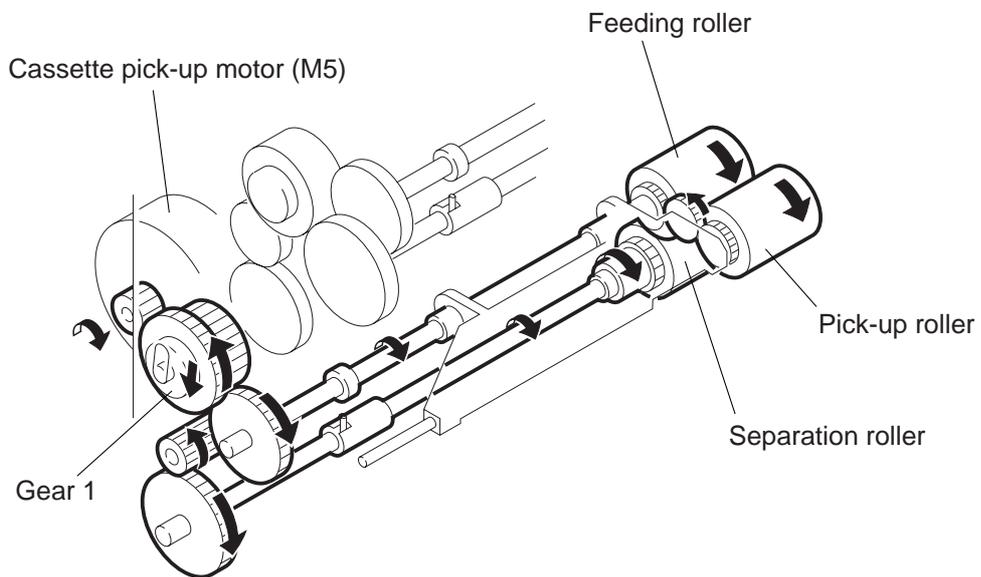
Lower Cassette Pick-Up Movement (pick-up motor rotating counterclockwise)
